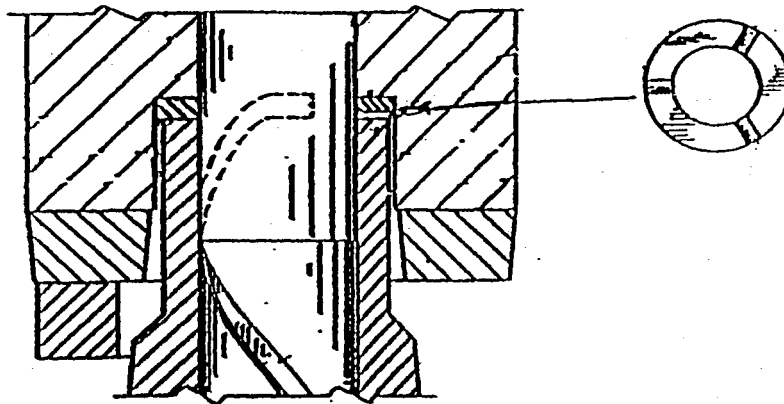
Cross-Sectional View of the Rotor, Bearing Hub and Thrust Bearing
